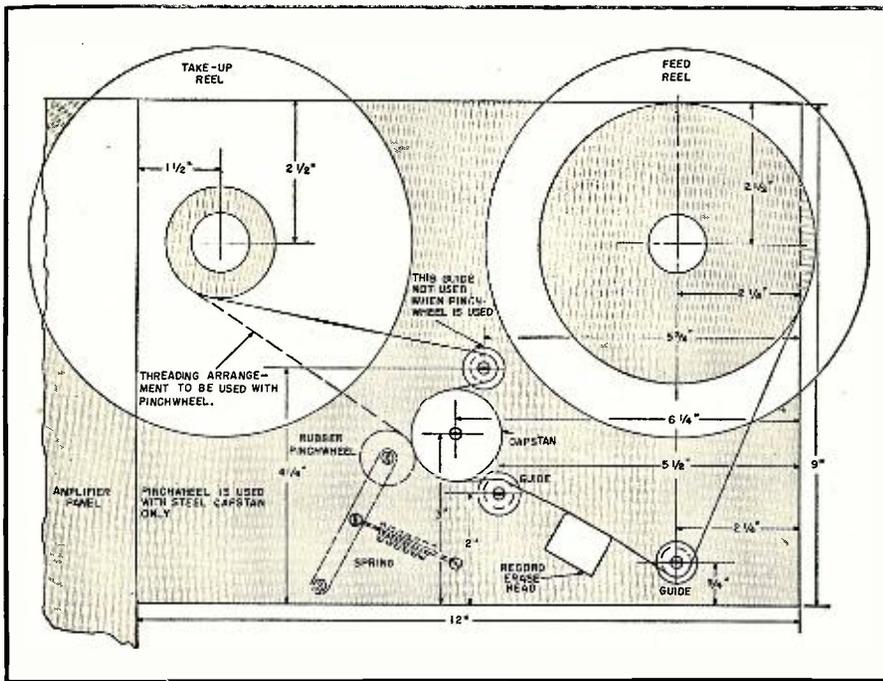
Top view of recorder deck showing threading arrangement for the tape.
